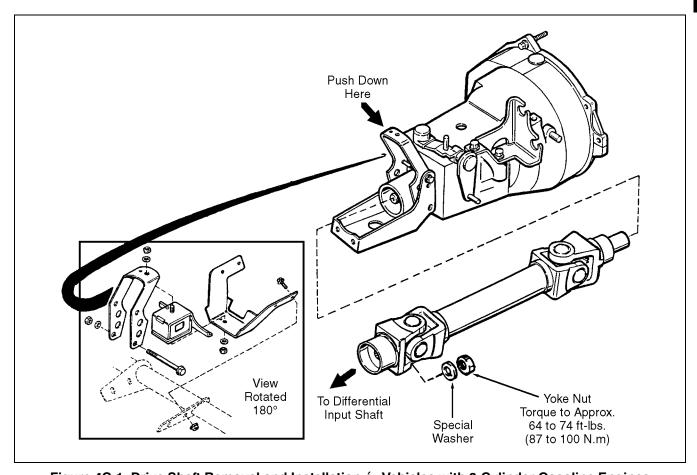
C-1. Drive Shaft Removal and Installation ó Vehicles with 3-Cylinder Gasoline Engines
